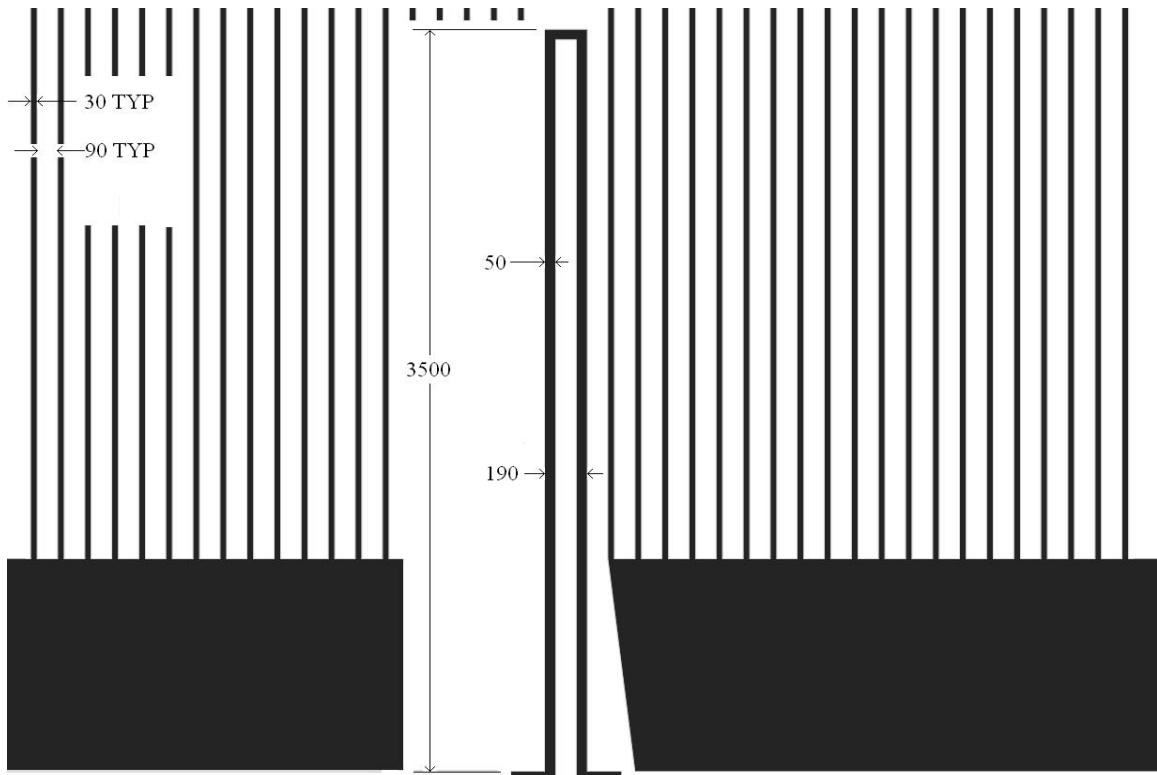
Exploded view of 5 mm heater with some elements deleted for clarity.
